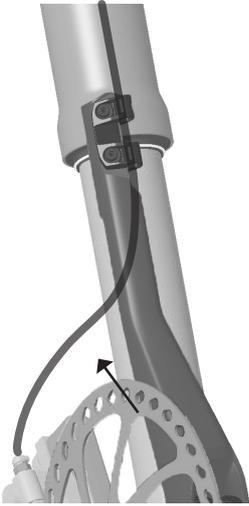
Full view of brake hose routing through brake hose guides and into mast
